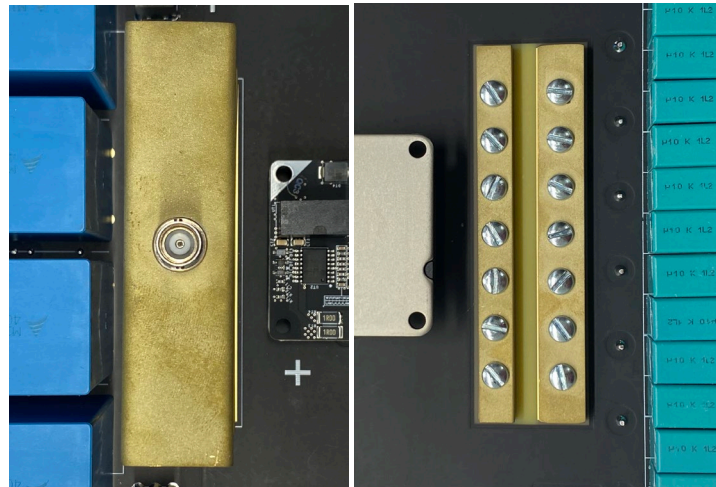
W2 bar CVR Installed in PCB from Top View (Left) and Bottom View (Right)
